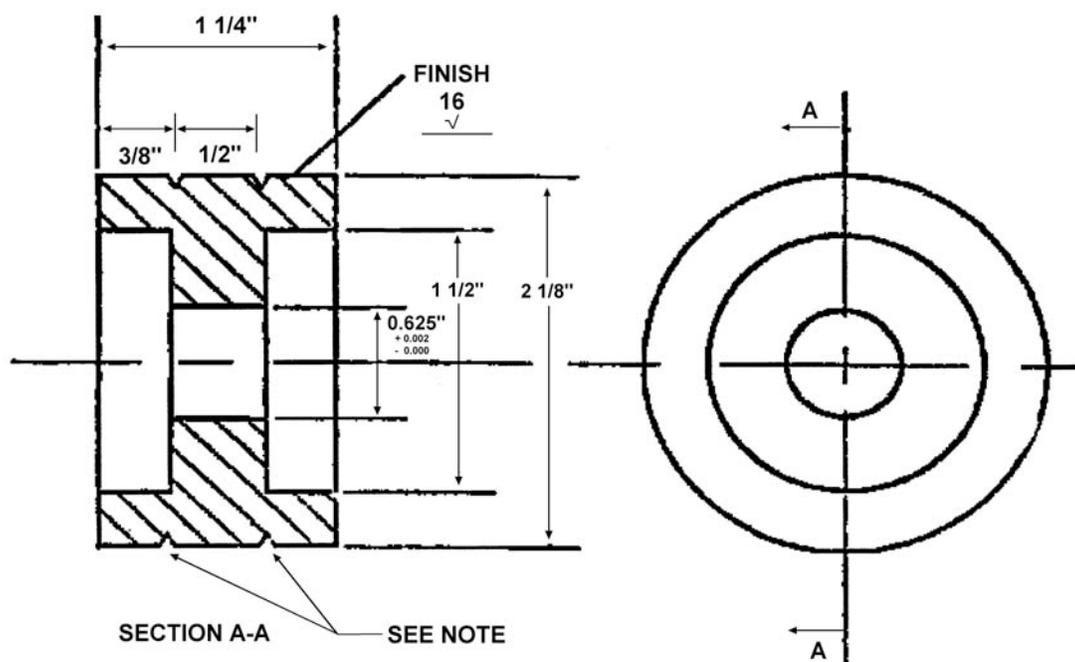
Test specimen for adhesion testing class II and IV cylindrical bearing and class V partial-arc bearing.
